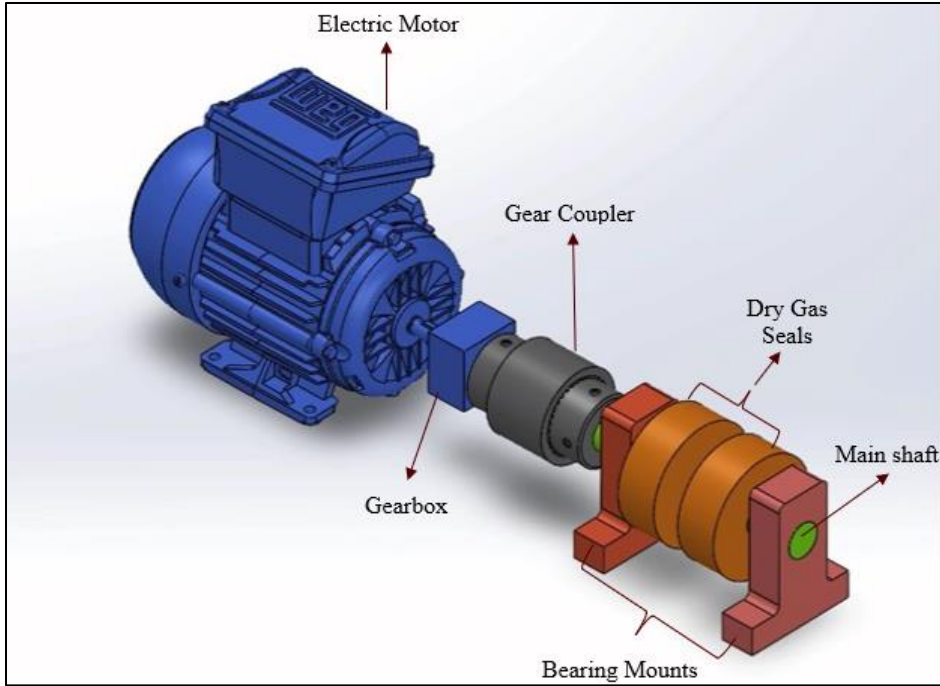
An overview of the shaft and motor assembly, not drawn to scale
